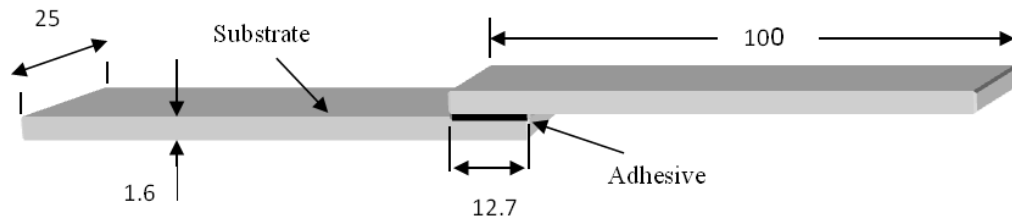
Test specimen used for lap shear strength with adhesive (dimensions in mm)
